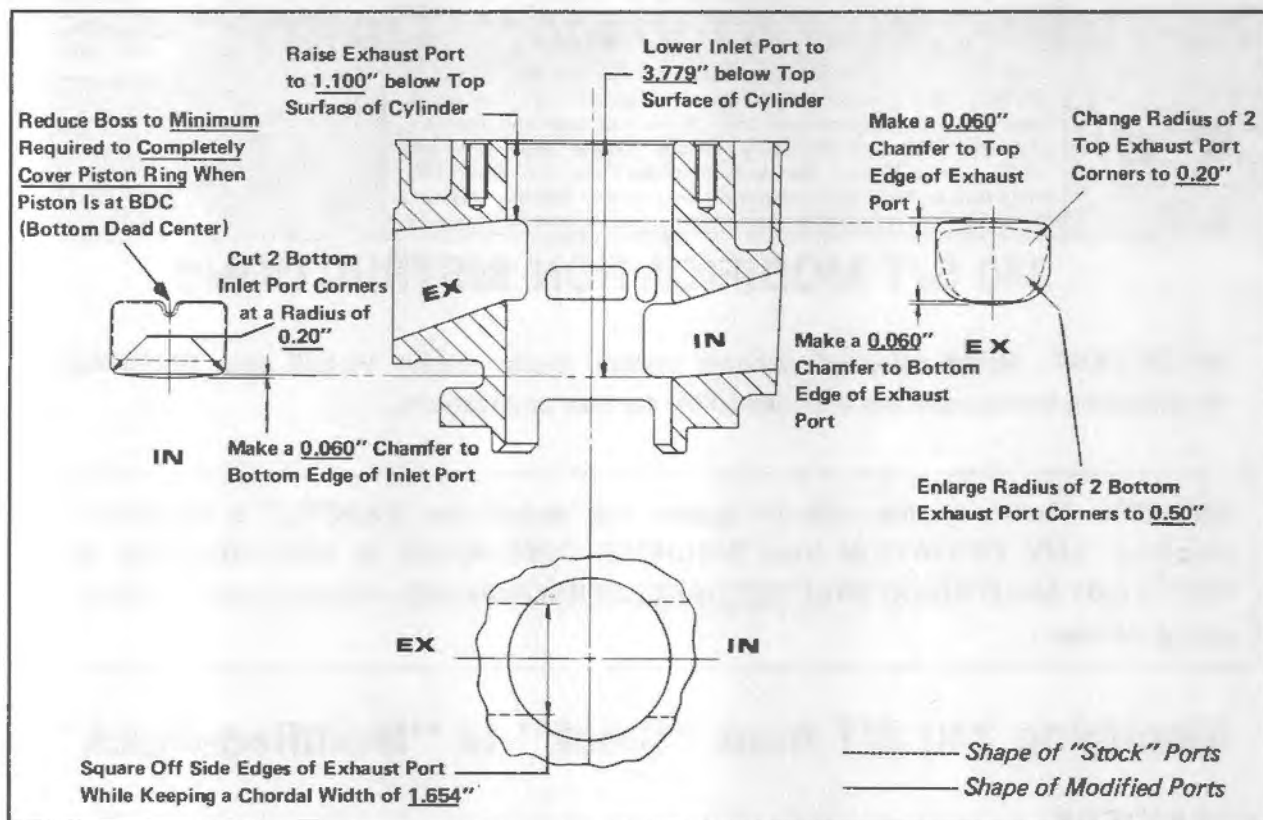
340 S/T "Modified-Stock" Cylinder Dimensions
